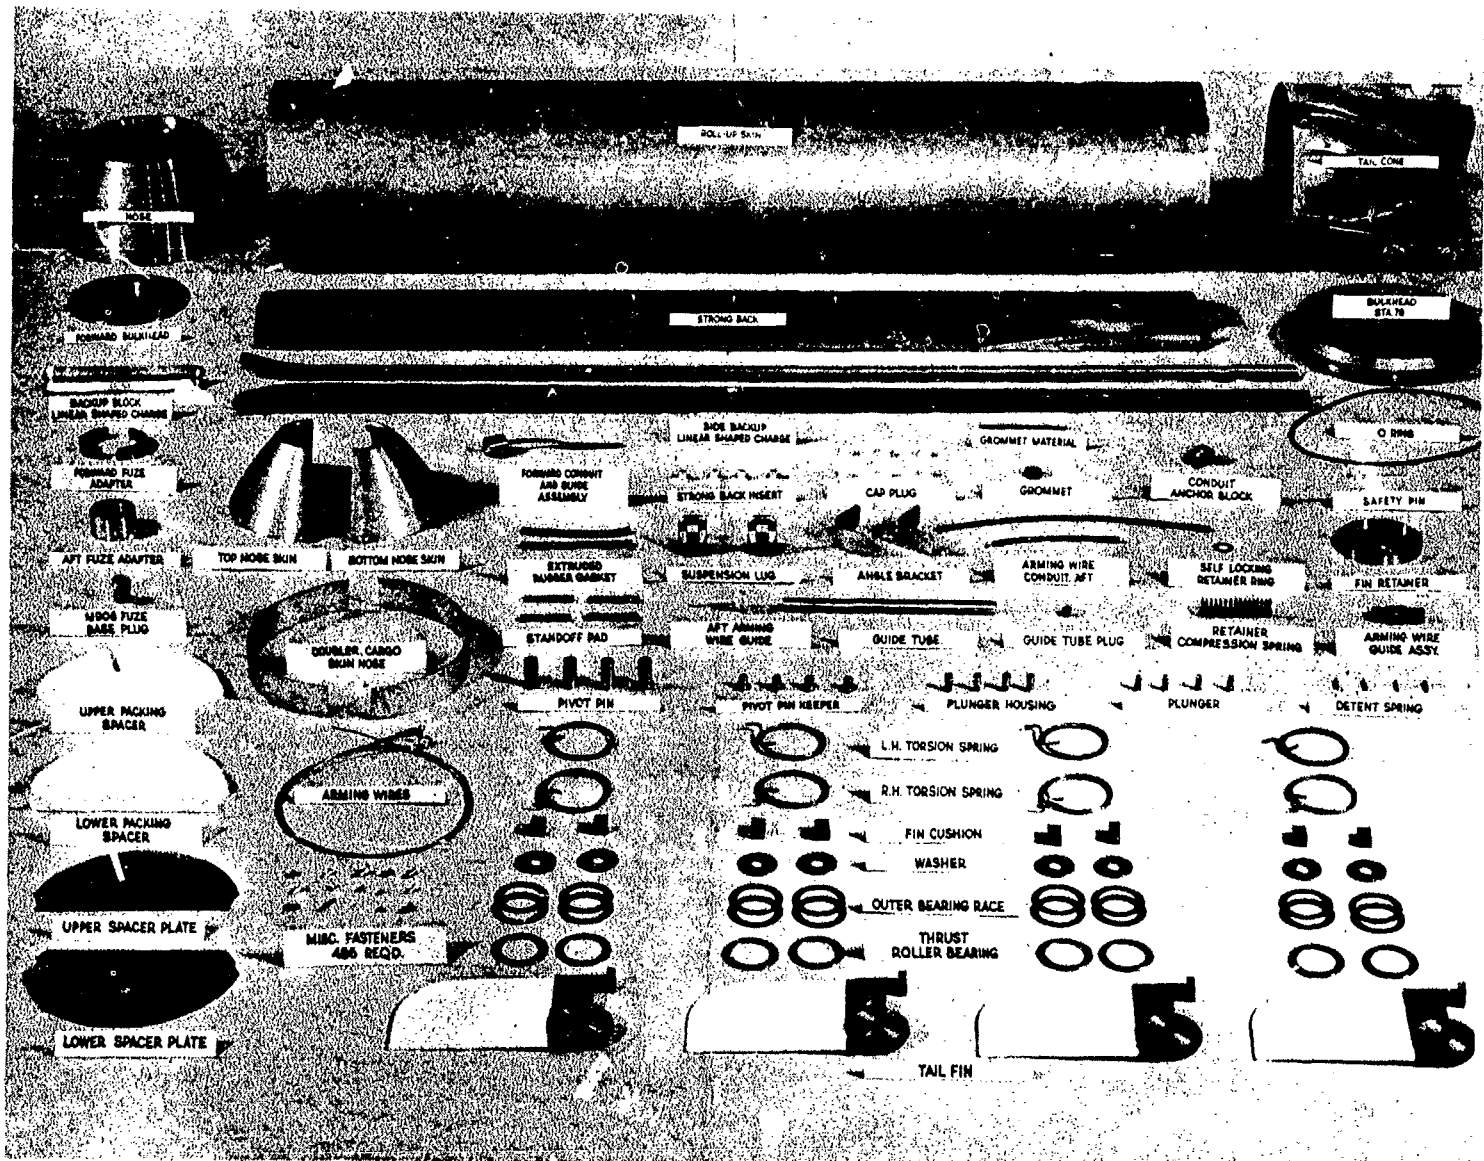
PARTS LAYOUT, ORIGINAL DISPENSER CONFIGURATION
